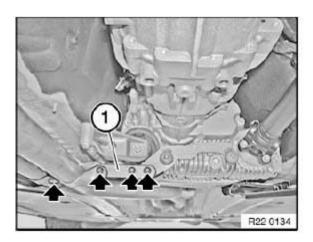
Identifying Exhaust System Bracket Courtesy of BMW OF NORTH AMERICA, INC.
